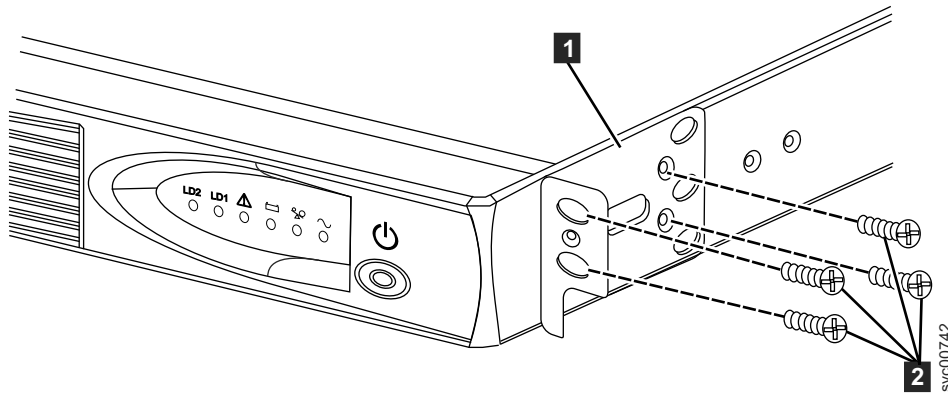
Installing the 2145 UPS-1U mounting brackets for the 2145 UPS-1U
